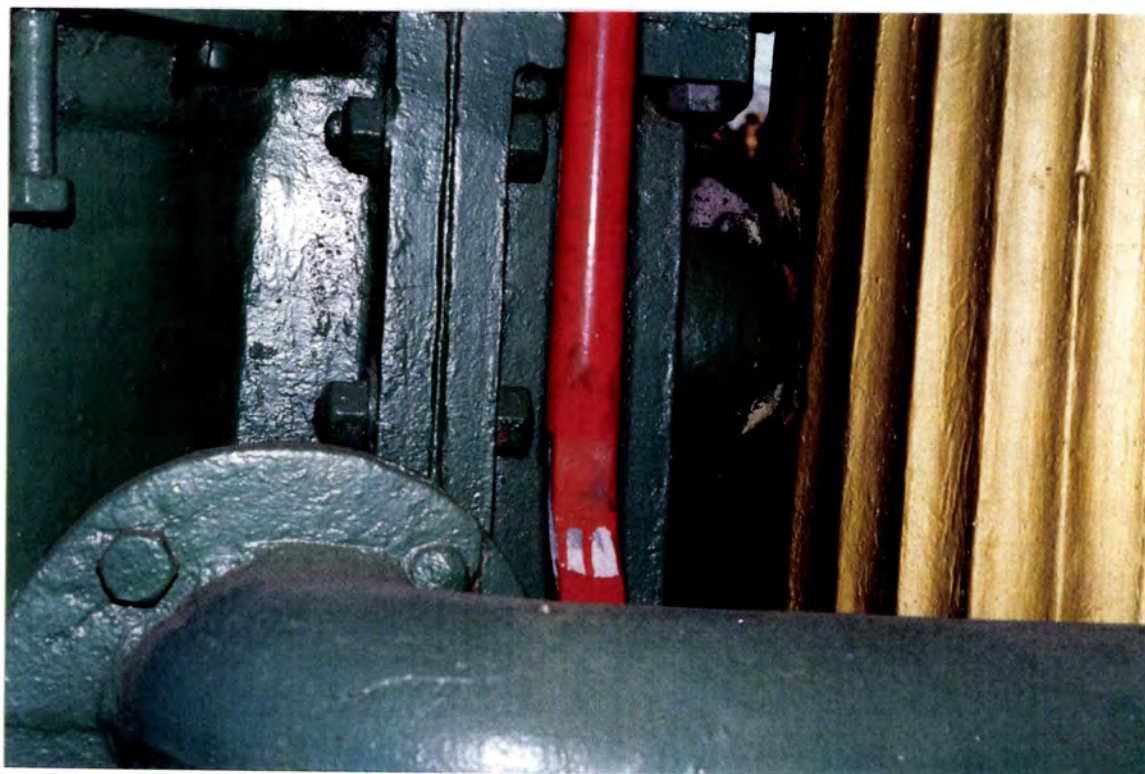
Showing recess cut into fluted central column to enable steam elbow to gain access to the H.P. valve chest, & the inaccessibility of the steam chest.
